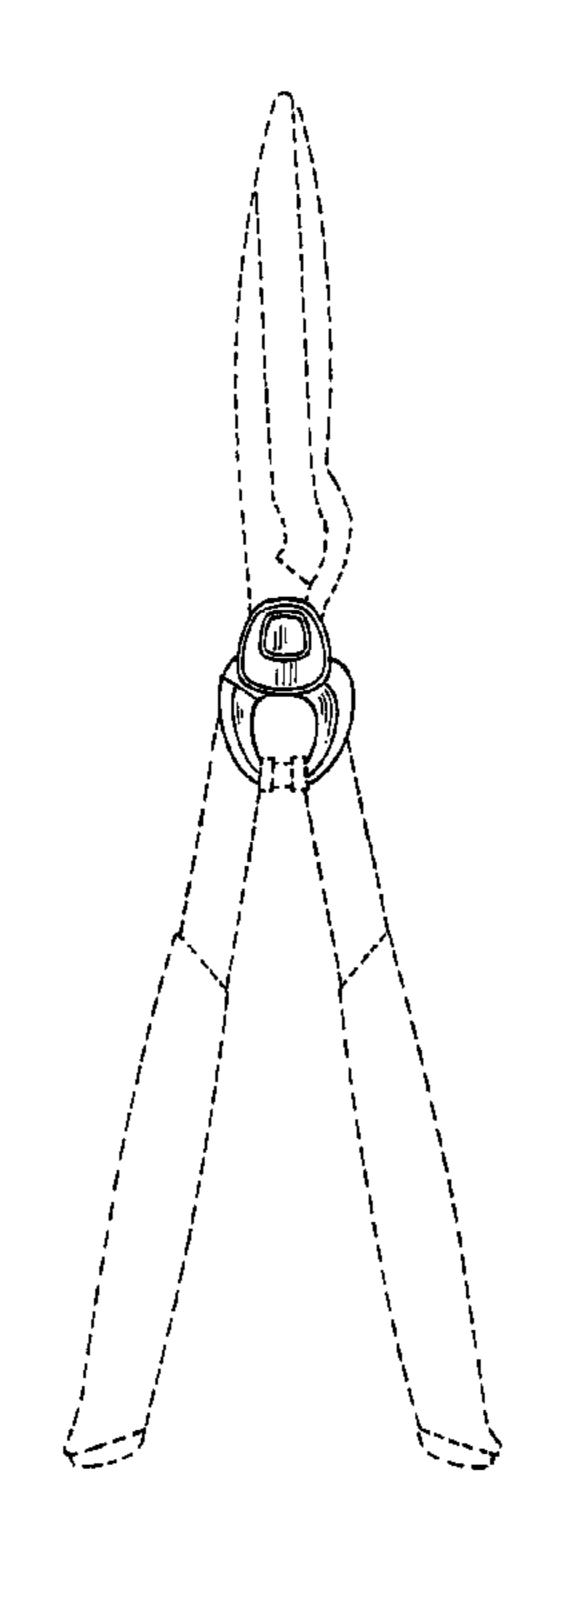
is a right side view of the third embodiment of a hand operated cutting tool of the claimed design.
